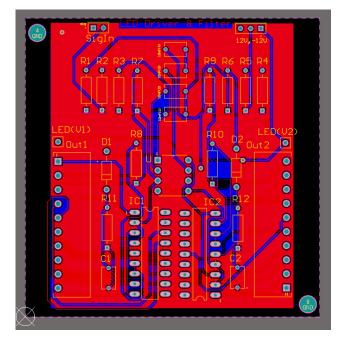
Filter And LED Driver PCB 2D Top Layer
